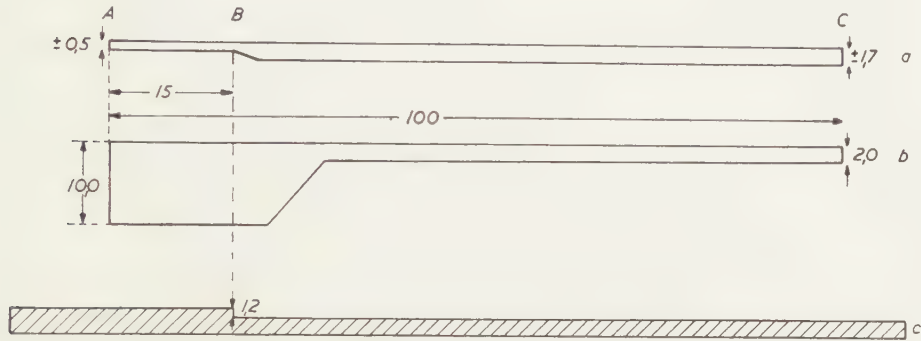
a) side-view of lead specimen; b) top-view of lead specimen, AB = actual crystal, BC = "tail"; c) sledge on which the specimen is brought into the furnace. Dimensions in mm.
